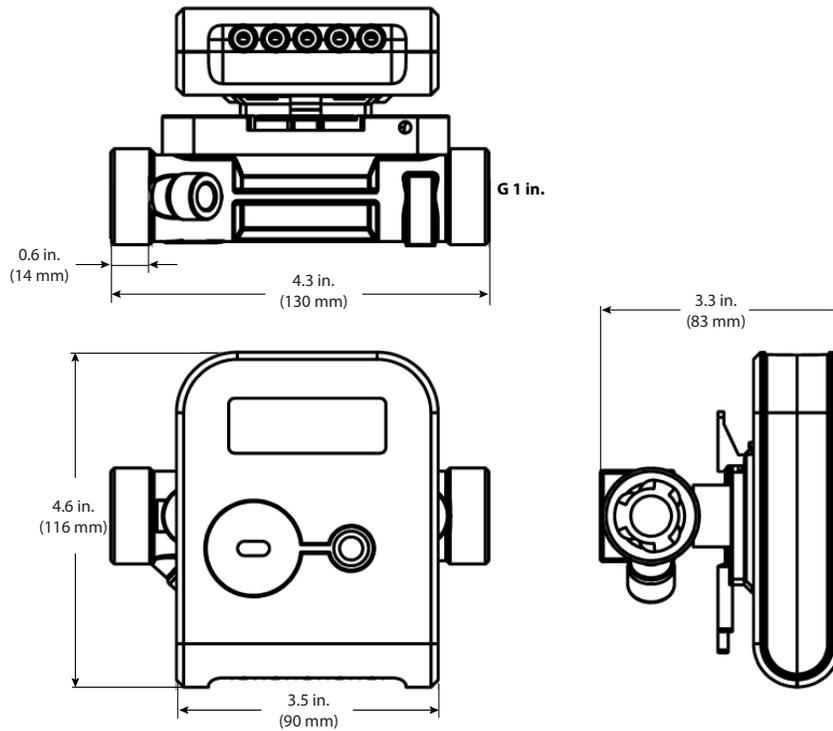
Flow sensor $q_p = 2.5/1.5 \text{ m}^3/\text{h}$, Length $L=130 \text{ mm}$; connection type: thread G1 in.
